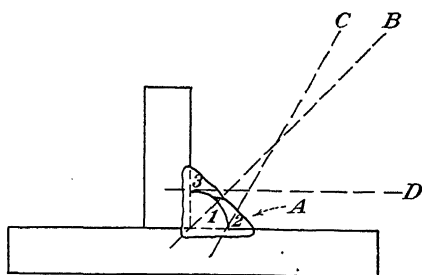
Three-pass fillet weld. 1, 2, and 3 indicate the order of deposited beads. A. Fairly flat surface of the finished weld. B, C, and D are positions of the electrode.
